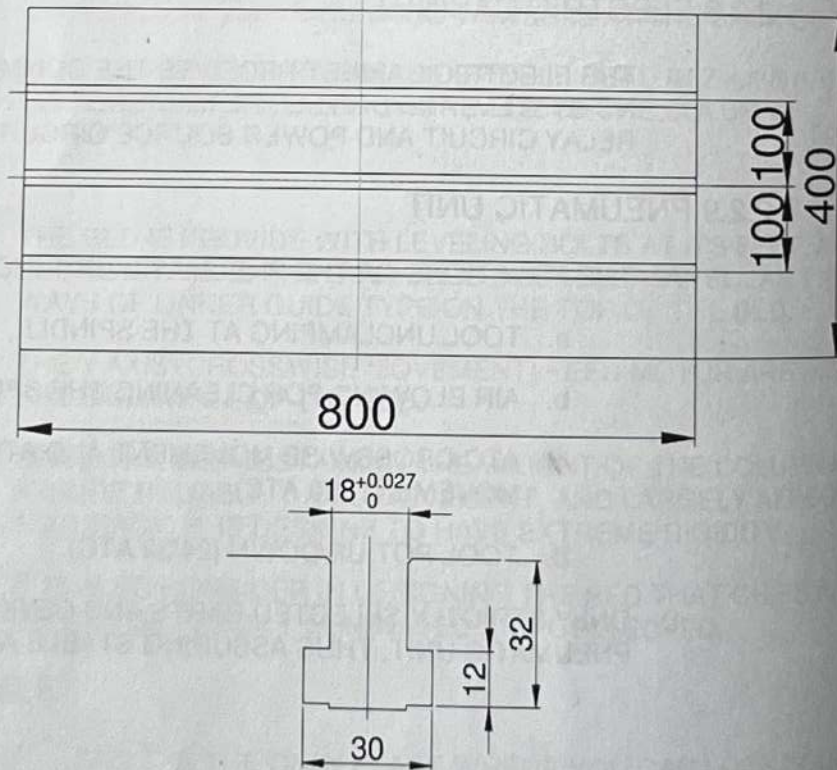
V43 PRINCIPAL DIMENSIONS OF TABLE
